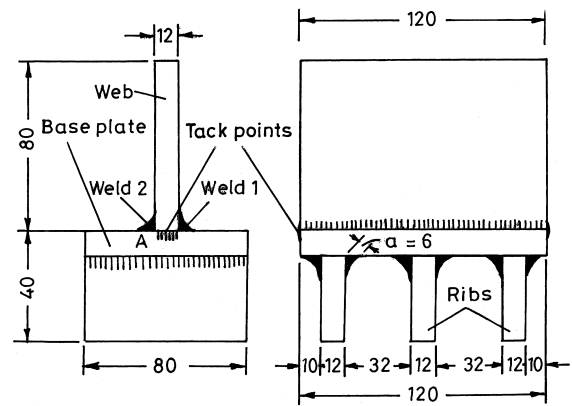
Specimen for double fillet weld test (dimensions in mm).
